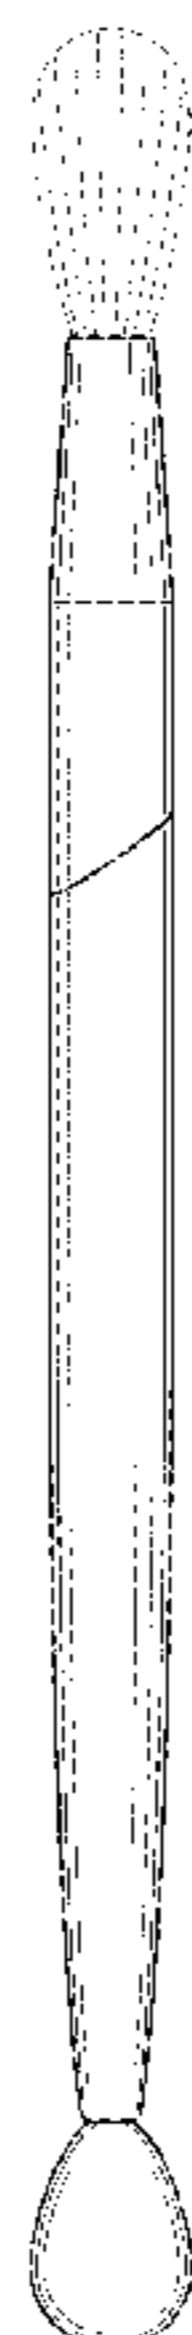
is a front elevational view of the embodiment illustrated in FIG. 1;
